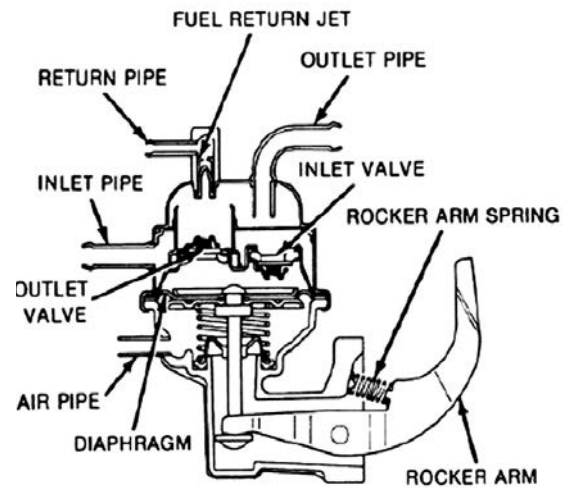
(a) Schematic of A.C. Mechanical Fuel Pump.
